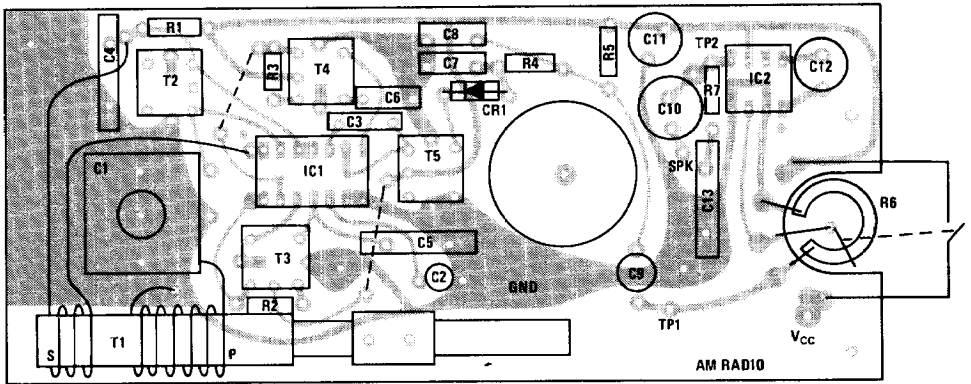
Typical Printed Circuit Board Radio Layout (Bottom View) (Not Shown Full Size)
